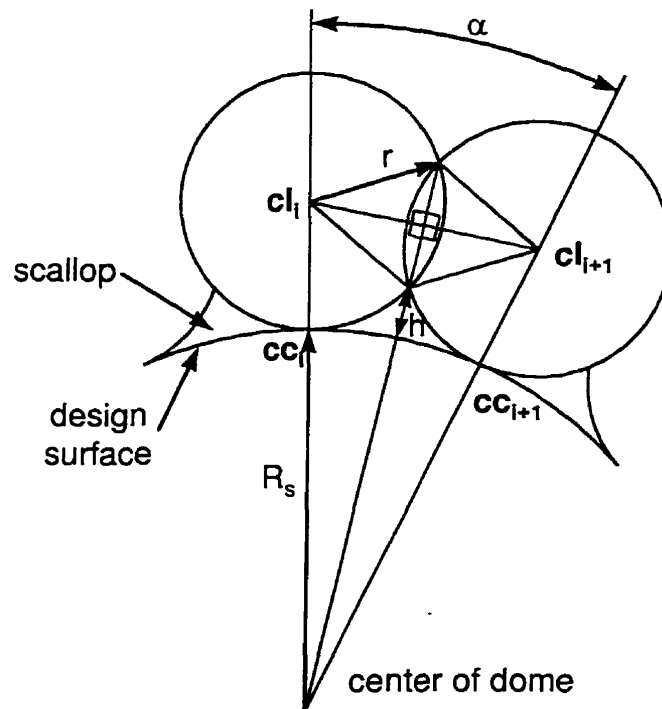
Tool pass interval calculation for ball nosed end mill machining a spherical dome.
